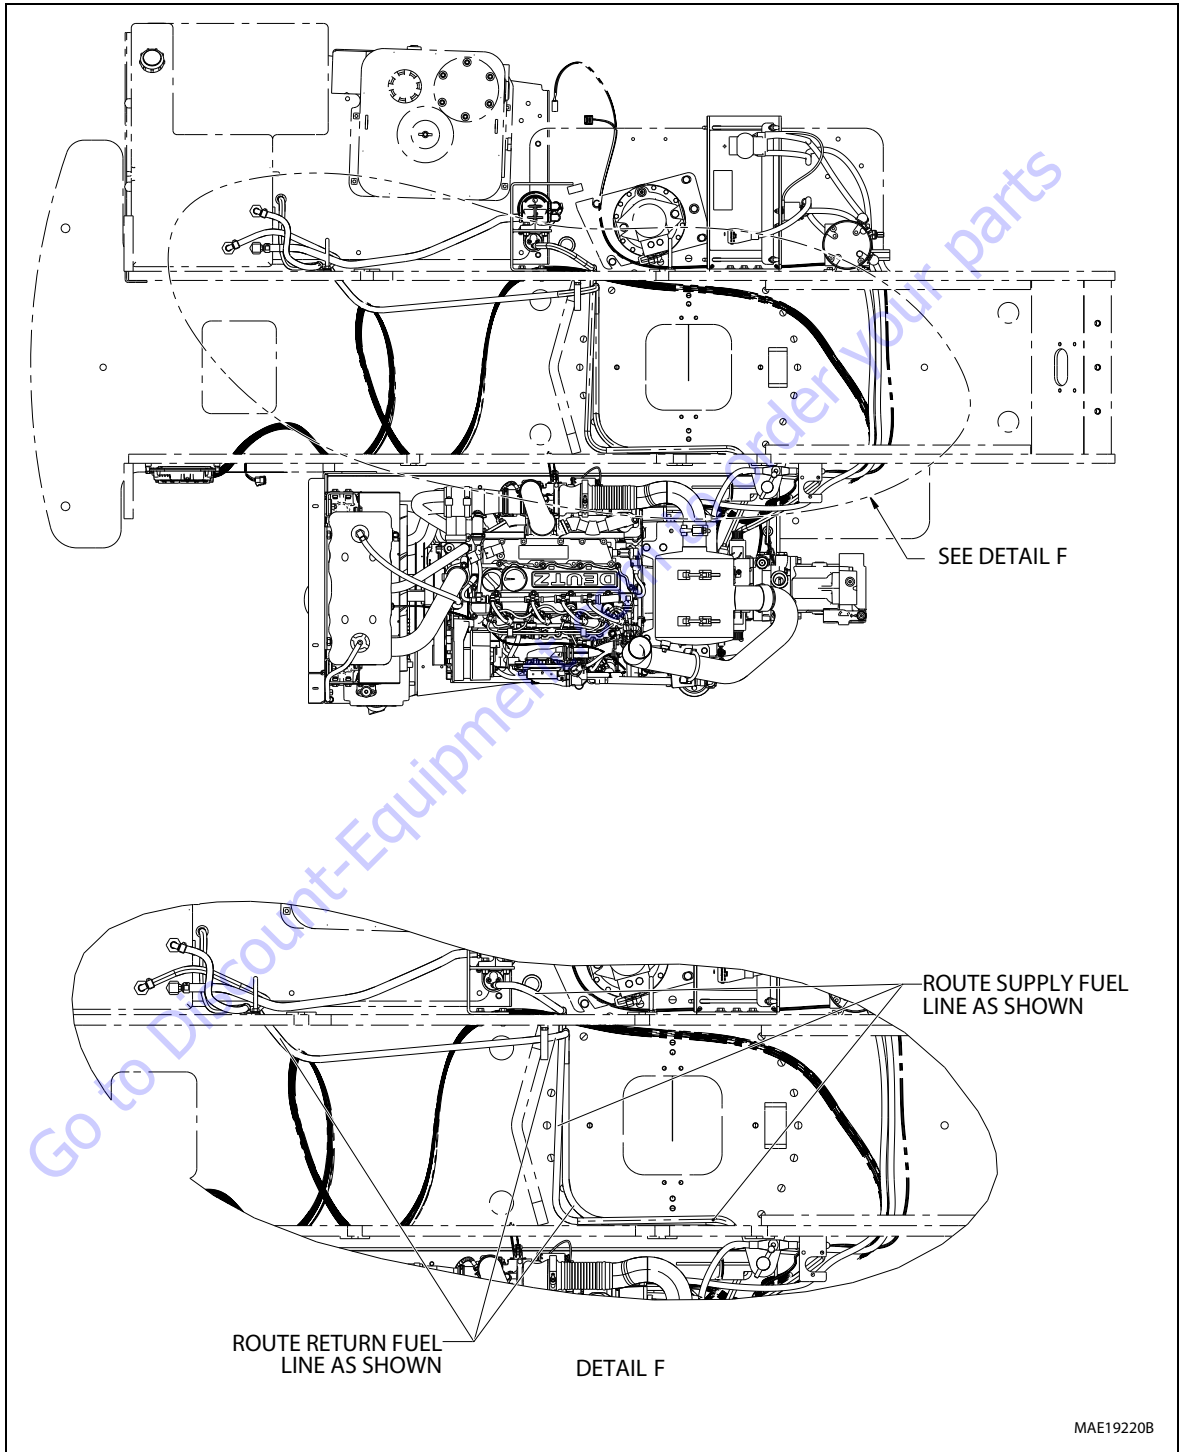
Deutz TD2.9L4 China III Engine Installation - Sheet 6 of 7
